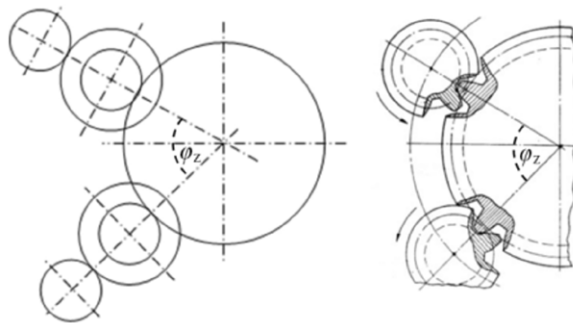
Schematic angular phasing of intermediate gears on the output gear wheel
